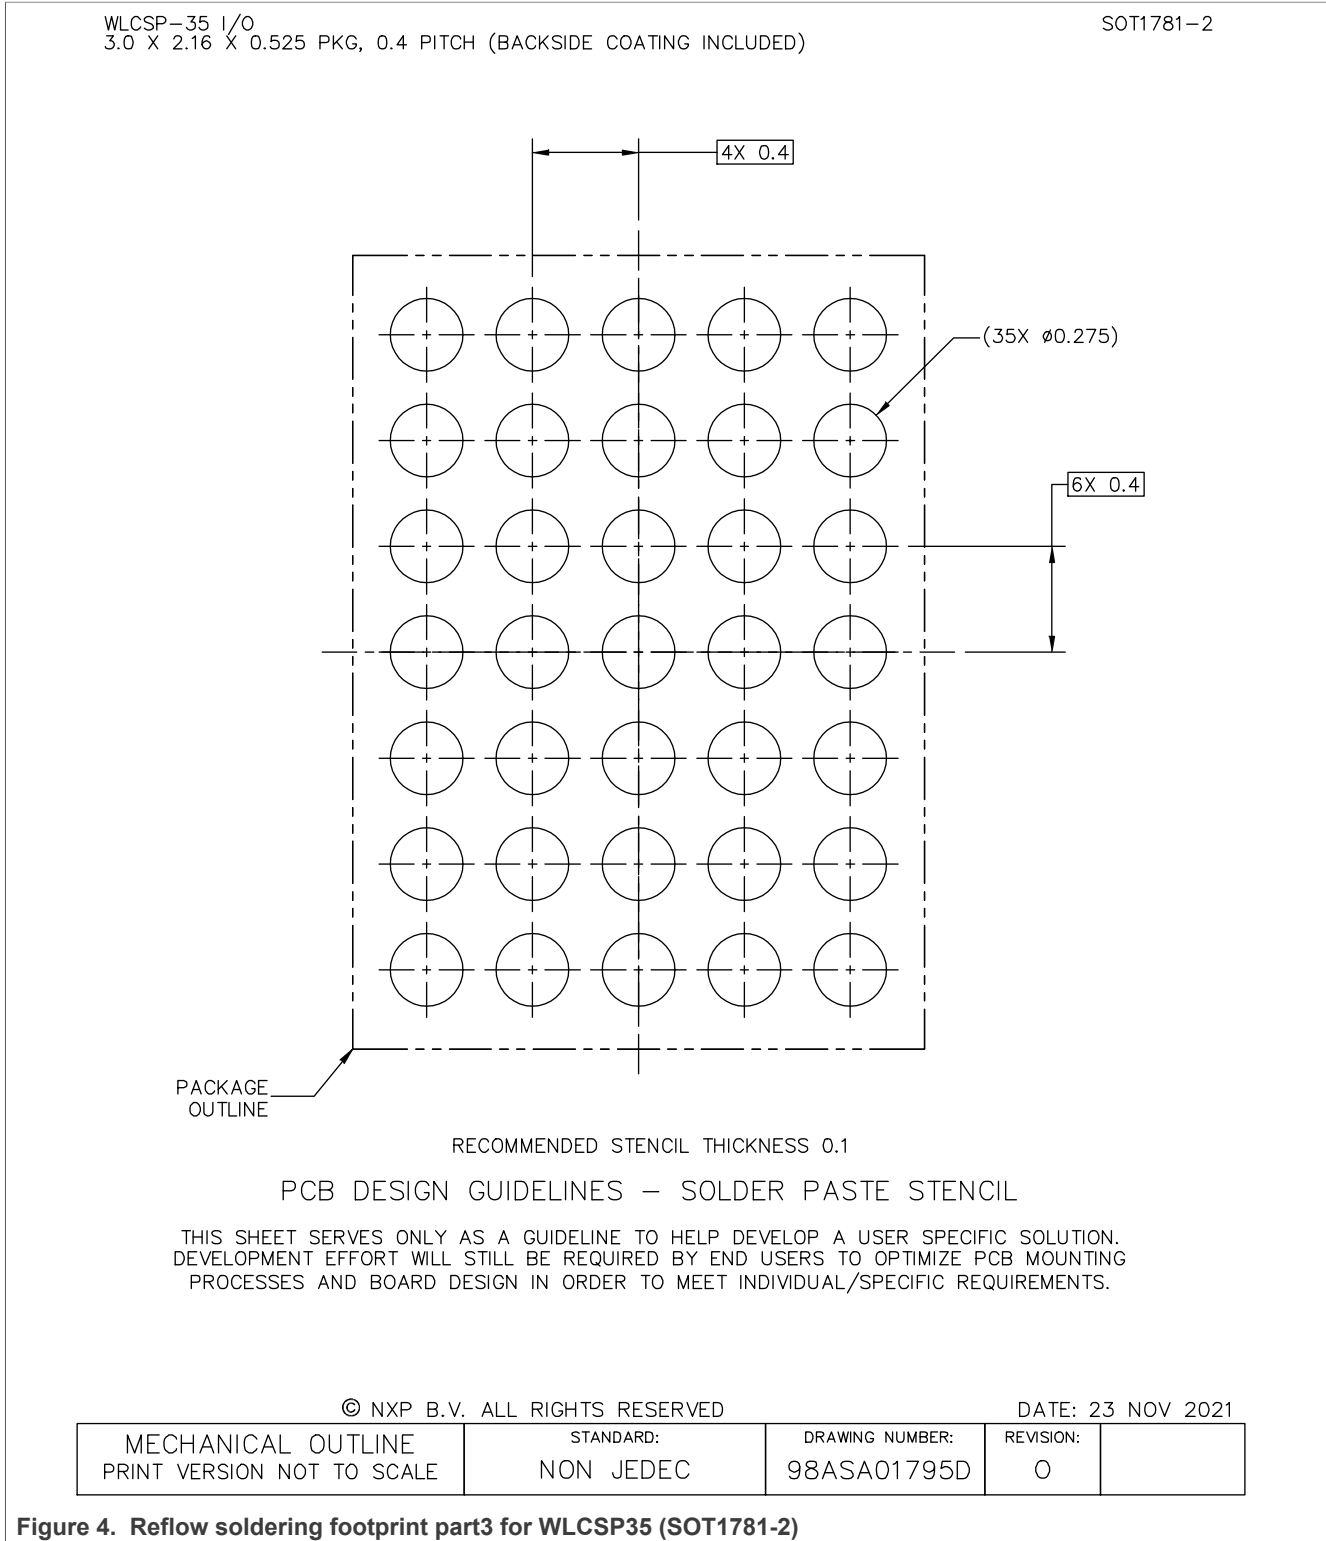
Reflow soldering footprint part3 for WLCSP35 (SOT1781-2)
